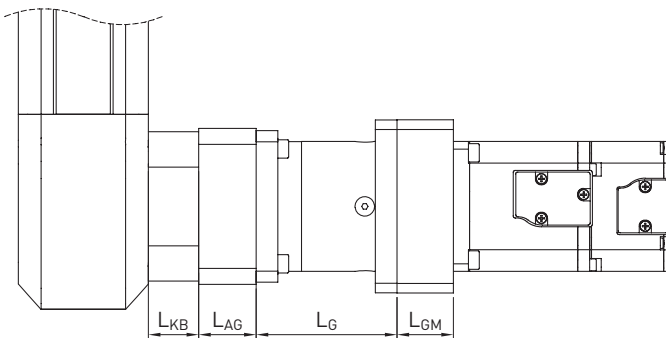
Motor connection of linear module HM-B with gearbox
